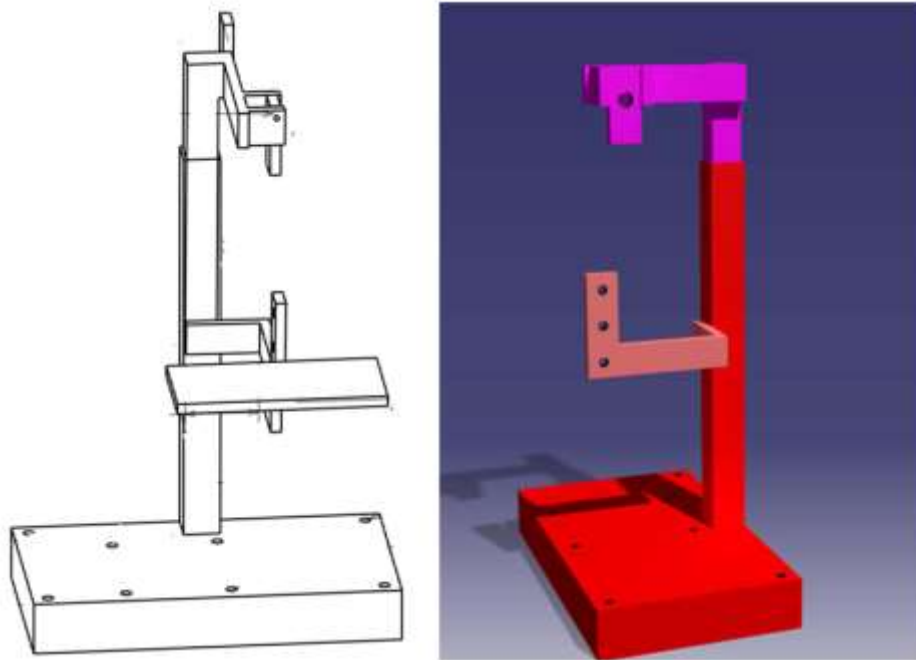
3D modelling of Belt Grinding Machine in CATIA
